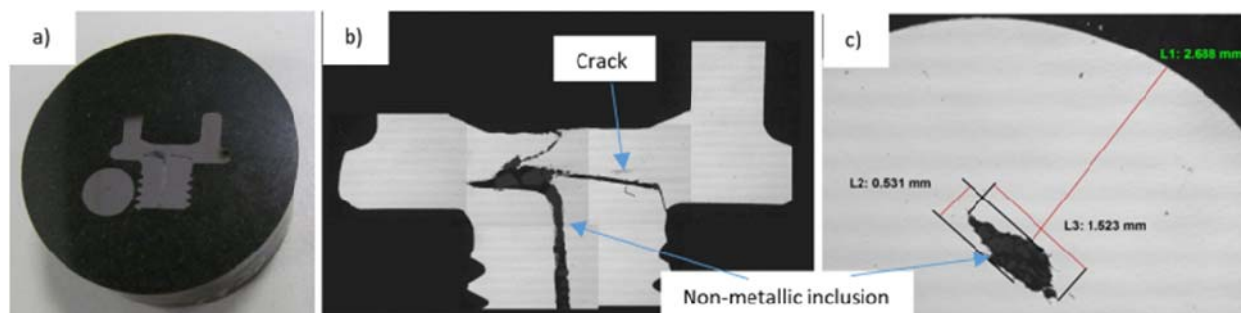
(a) Metallographic sample with a visible defect, (b) longitudinal section through the bolt head, (c) cross section through the threaded portion of the bolt
